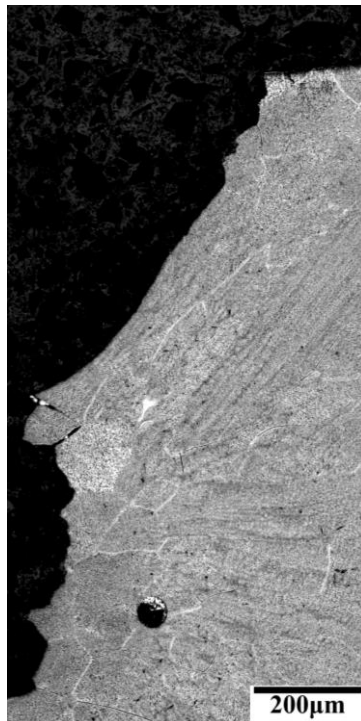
Cross-section of the fracture surface in Figure 3.49 showing fracture through the FZ (top) and HAZ (bottom) of the EBW Ti-5553 specimen heat treated at 804°C/1h followed by aging at 600°C/4h.
